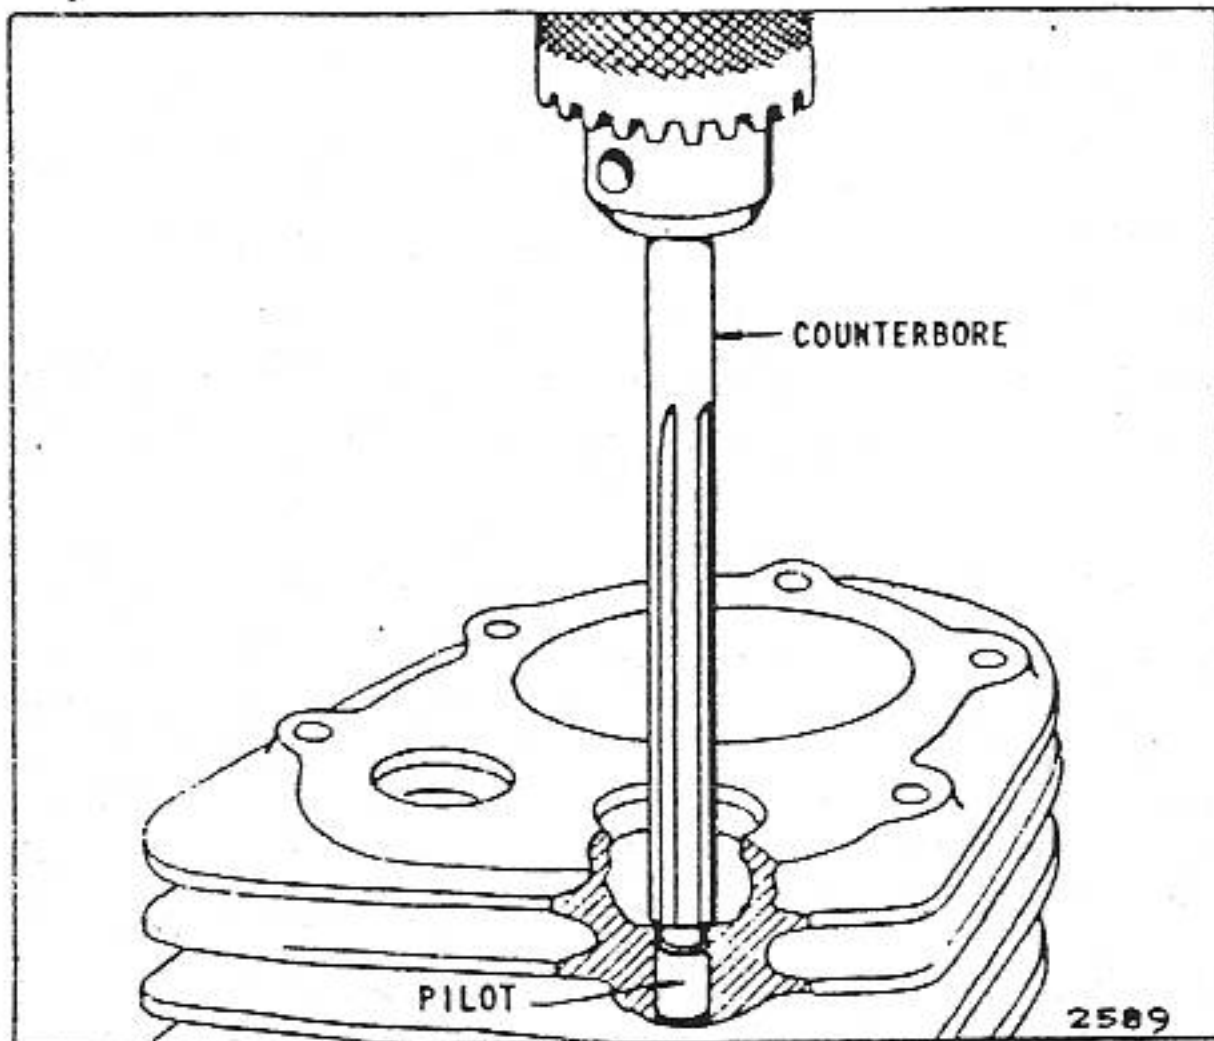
COUNTERBORING FOR VALVE GUIDE
